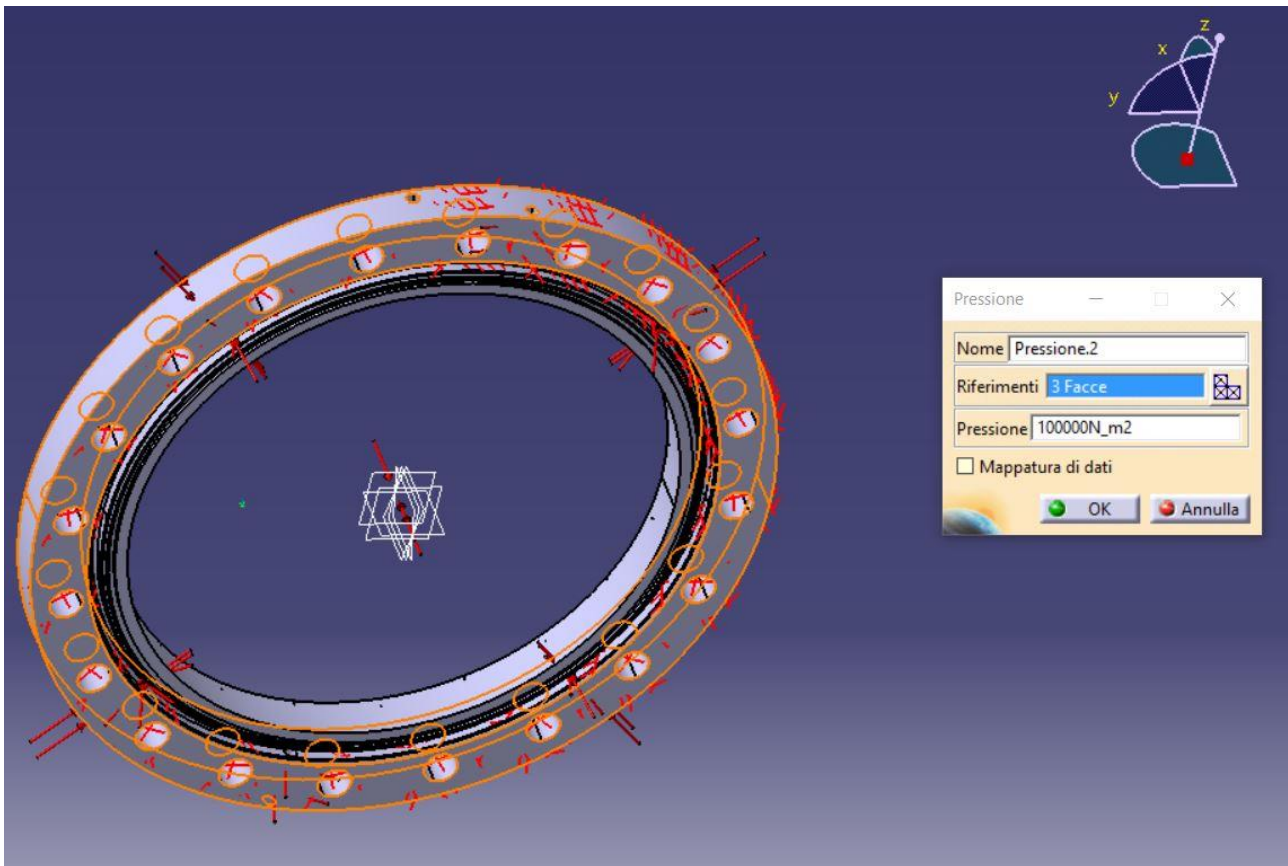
Loads for the FEM analysis of the flange, pressure load of 10^5 Pa on the external faces of the flange
